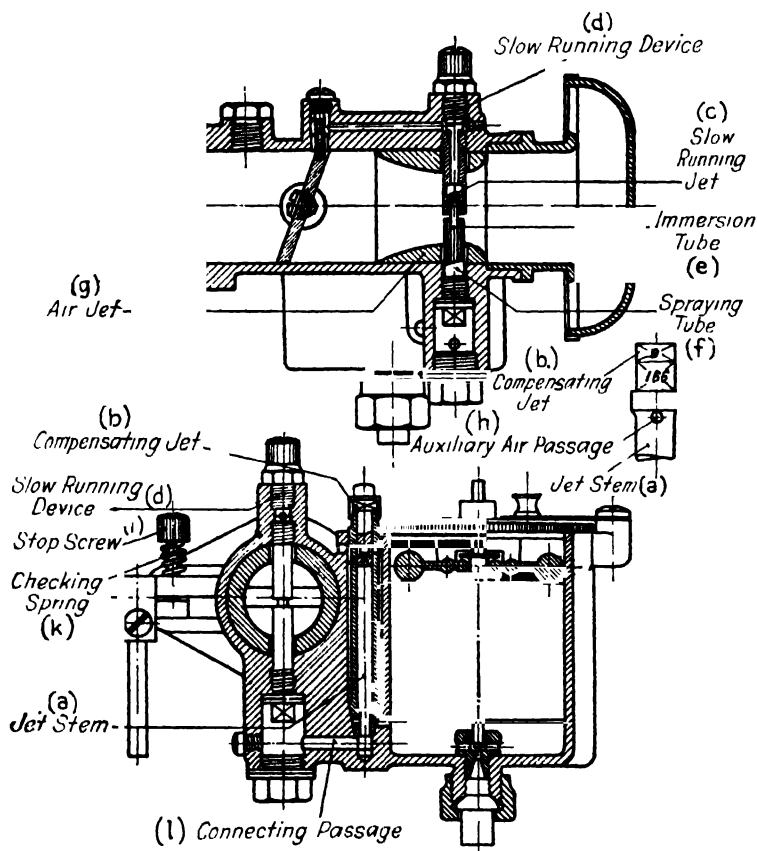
Sectional Drawing Showing Construction of the SUM Carburetor Used with Siemens-Halske Aviation Engines.
